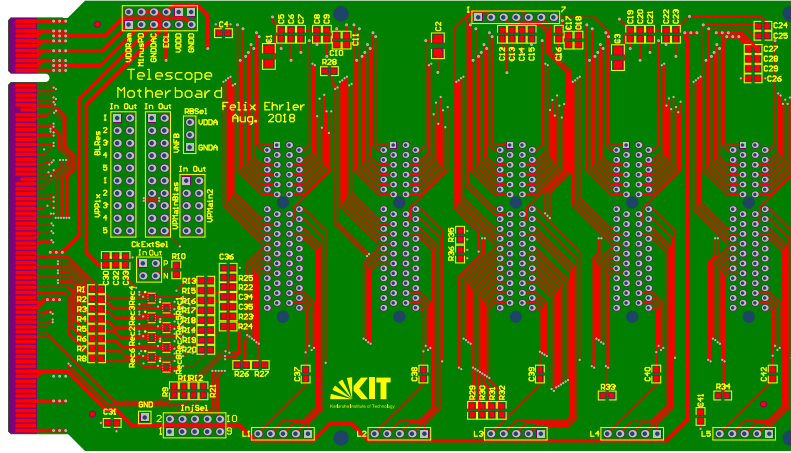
Top layout of the Beam Telescope mother board. It is to be plugged into the GECCO board.
